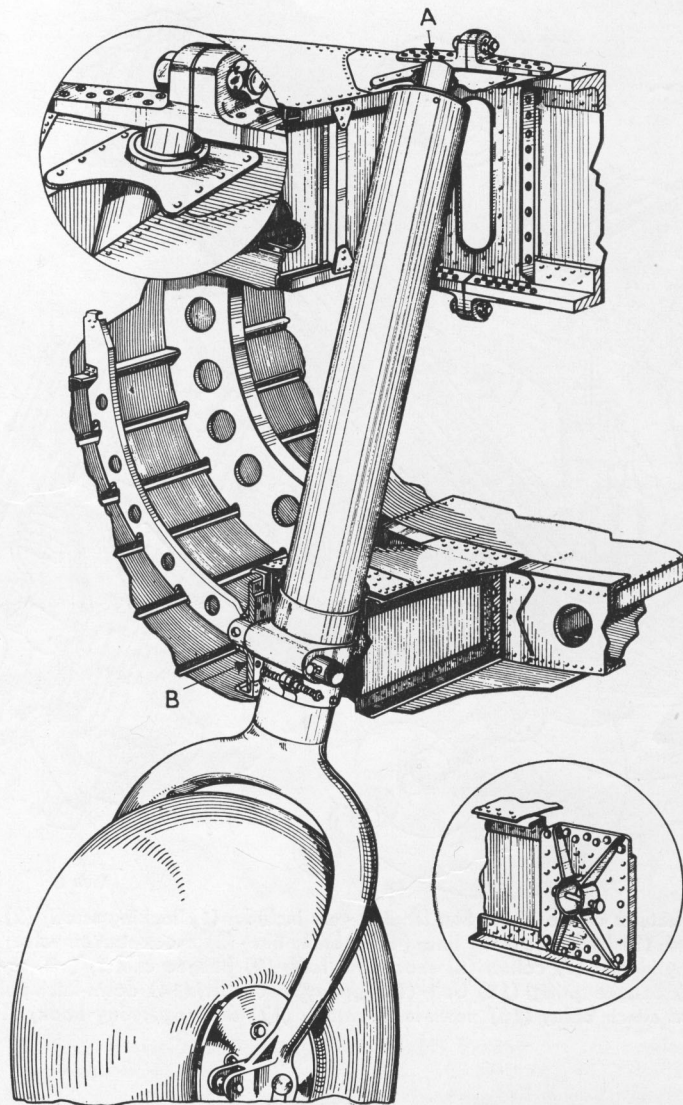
Details of mounting the nonretractable tail wheel on the Avro Lancaster, with the top mounting (A), which attaches to the stabilizer front spar web, enlarged in the circle at the top; the bottom mounting point (B) enlarged in the circle at the lower right.
